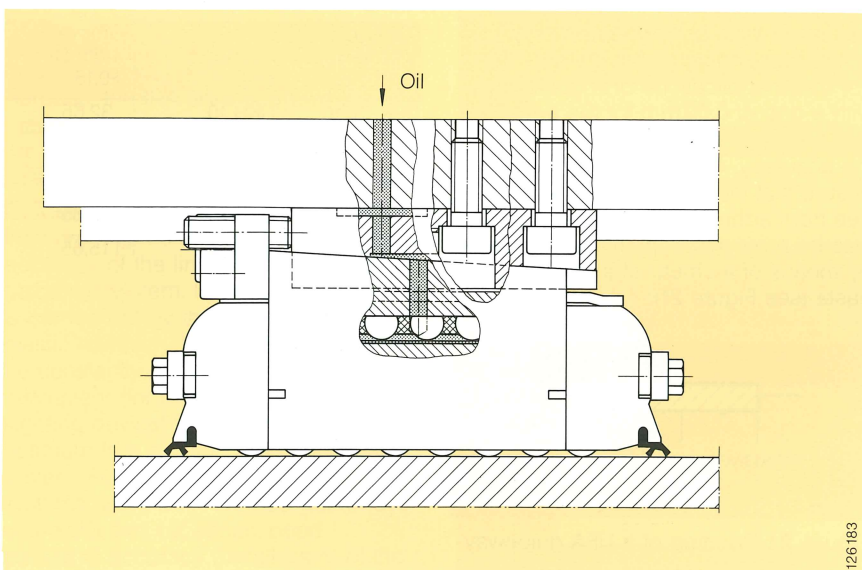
Fixing of a linear roller bearing with integral adjusting gib RUSV..KS
